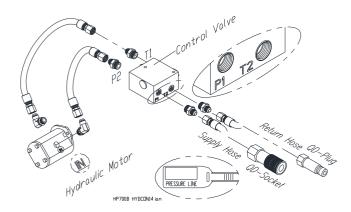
Supply Hose, Valve & Motor Ports Identified
